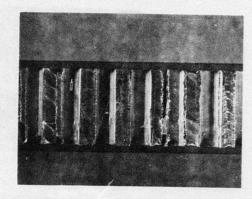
Close-up Photo Of Honeycomb Test Panel At Edge
